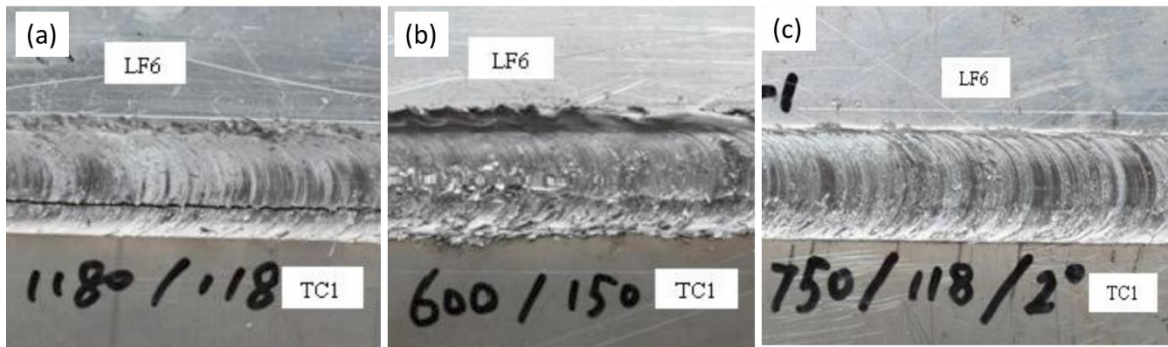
Friction stir welding effect of tool rotation speed and welding travel speed on the joint morphology of titanium/ aluminium weldments [98].
